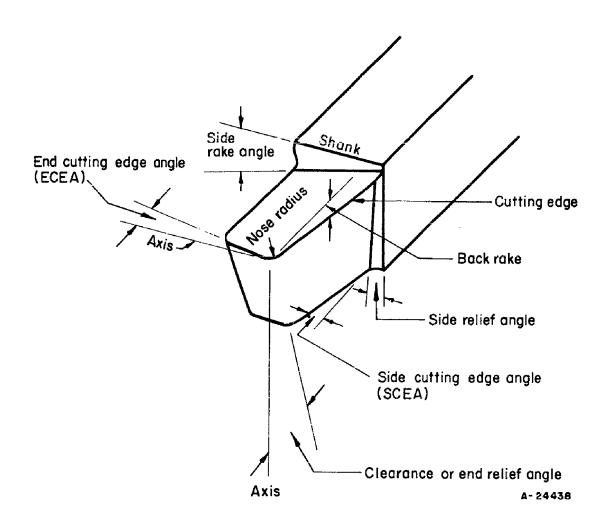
NOMENCLATURE FOR SINGLE-POINT CUTTING TOOLS
